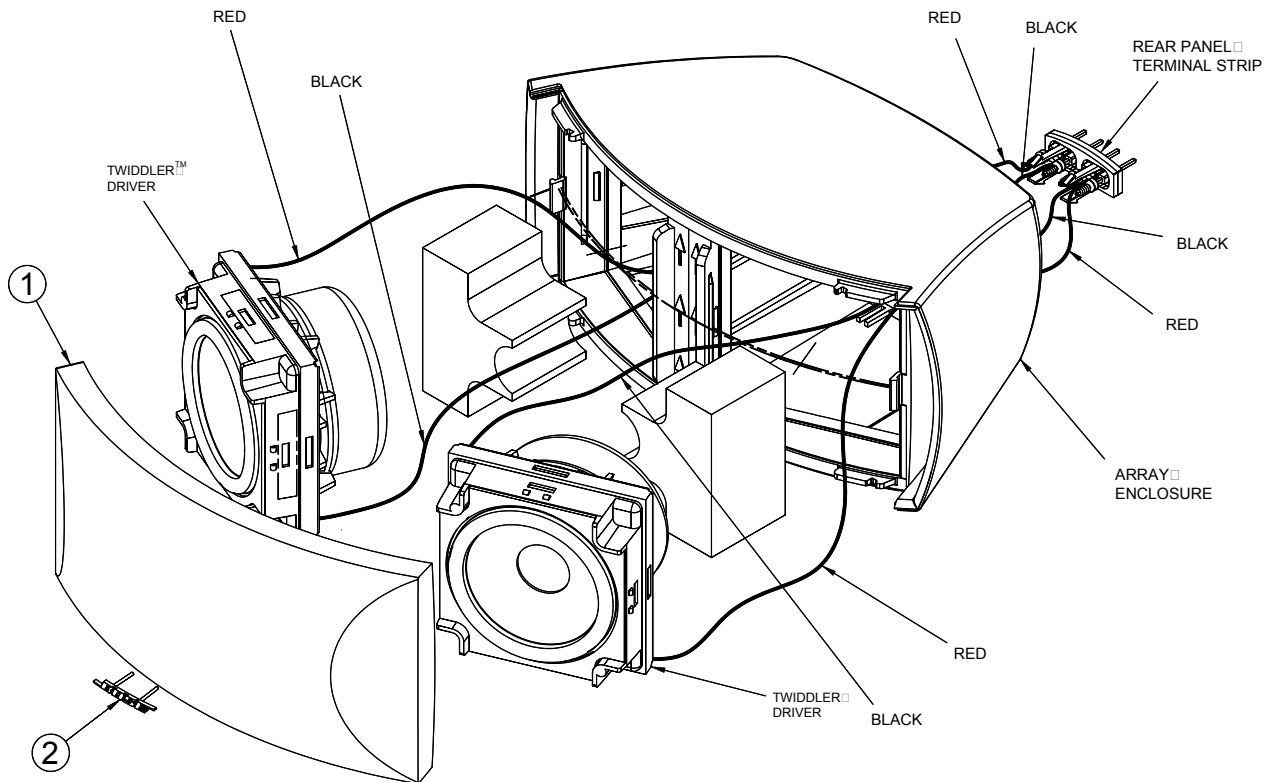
Standard 3•2•1 Array Assembly Exploded View
